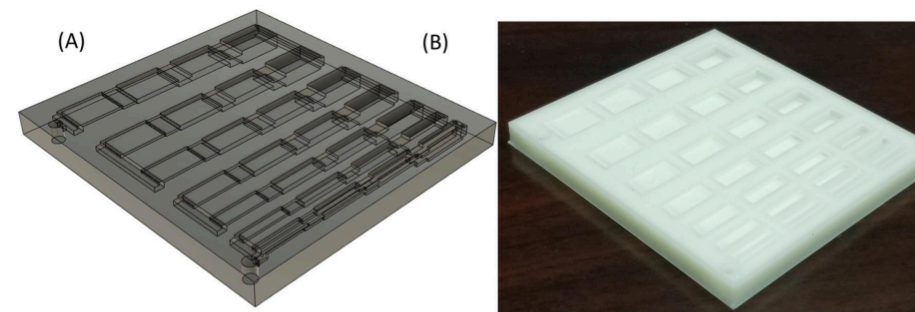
CAD drawing of imaging phantom (A) and 3D printed imaging phantom (B).
